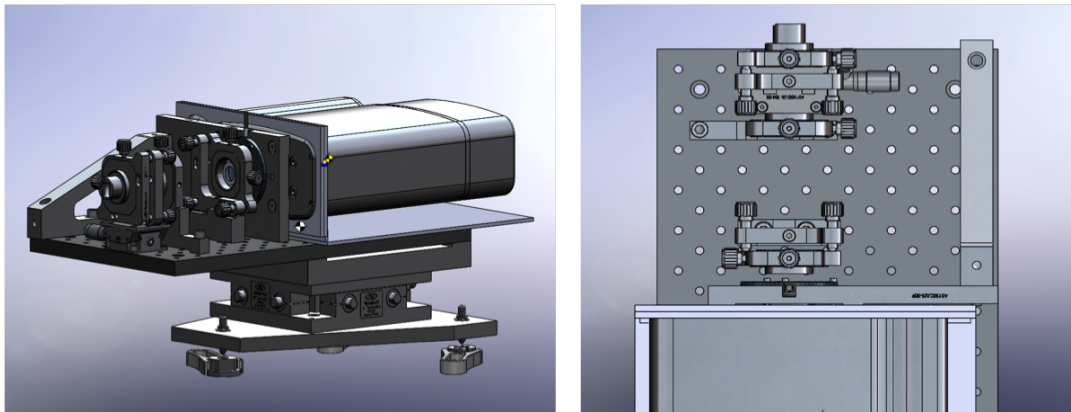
WFS mechanical assembly. The assembly contains the WFS camera, microlens array and two relay lenses. The assembly sits on three kinematic feet for tip, tilt, and piston adjustment, in addition to registration for replacing the assembly if it is removed.
